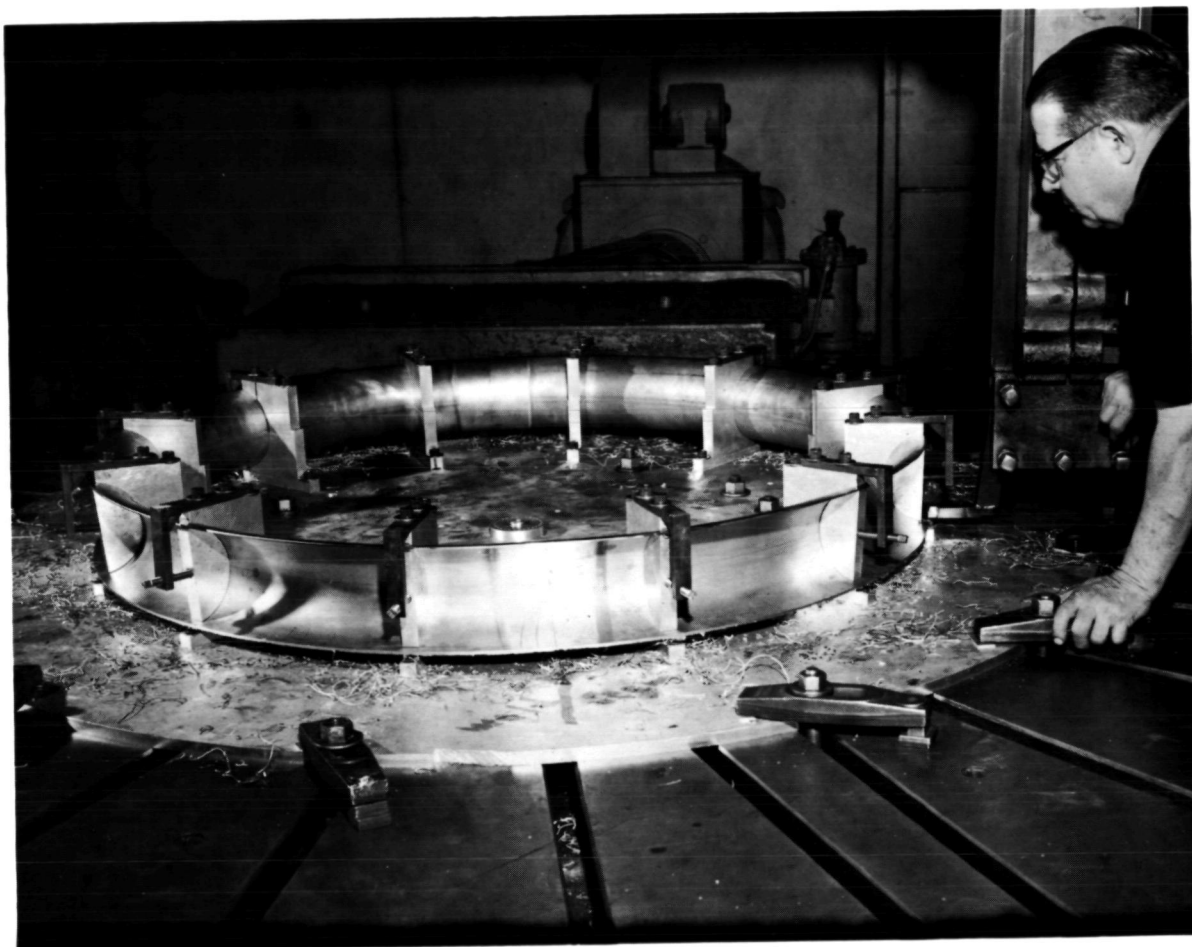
Machining for Circumferential Weld Joint on Inner Manifold Section. (P69-2-36D)
